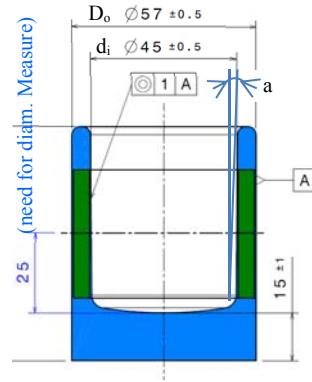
Dimensional and geometric tolerances of the thixoforged tube.
